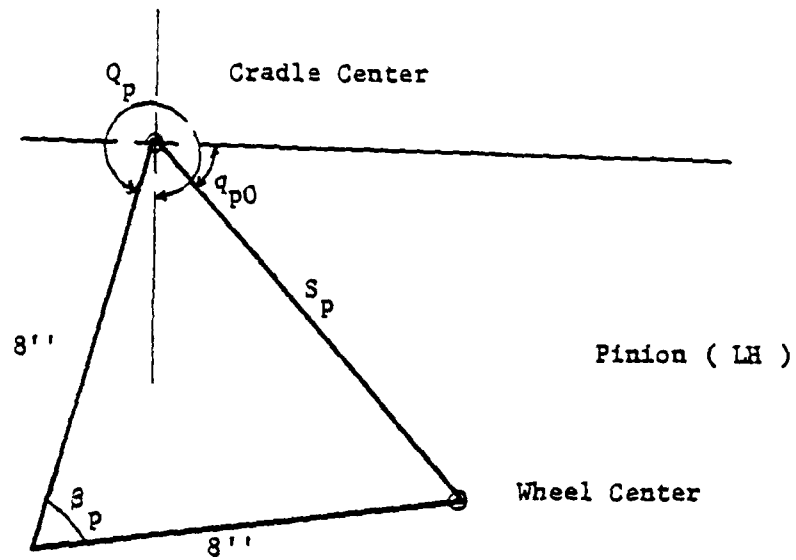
Cradle Settings in the Spiral Bevel Gear Cutting Machine of the Gleason Works
